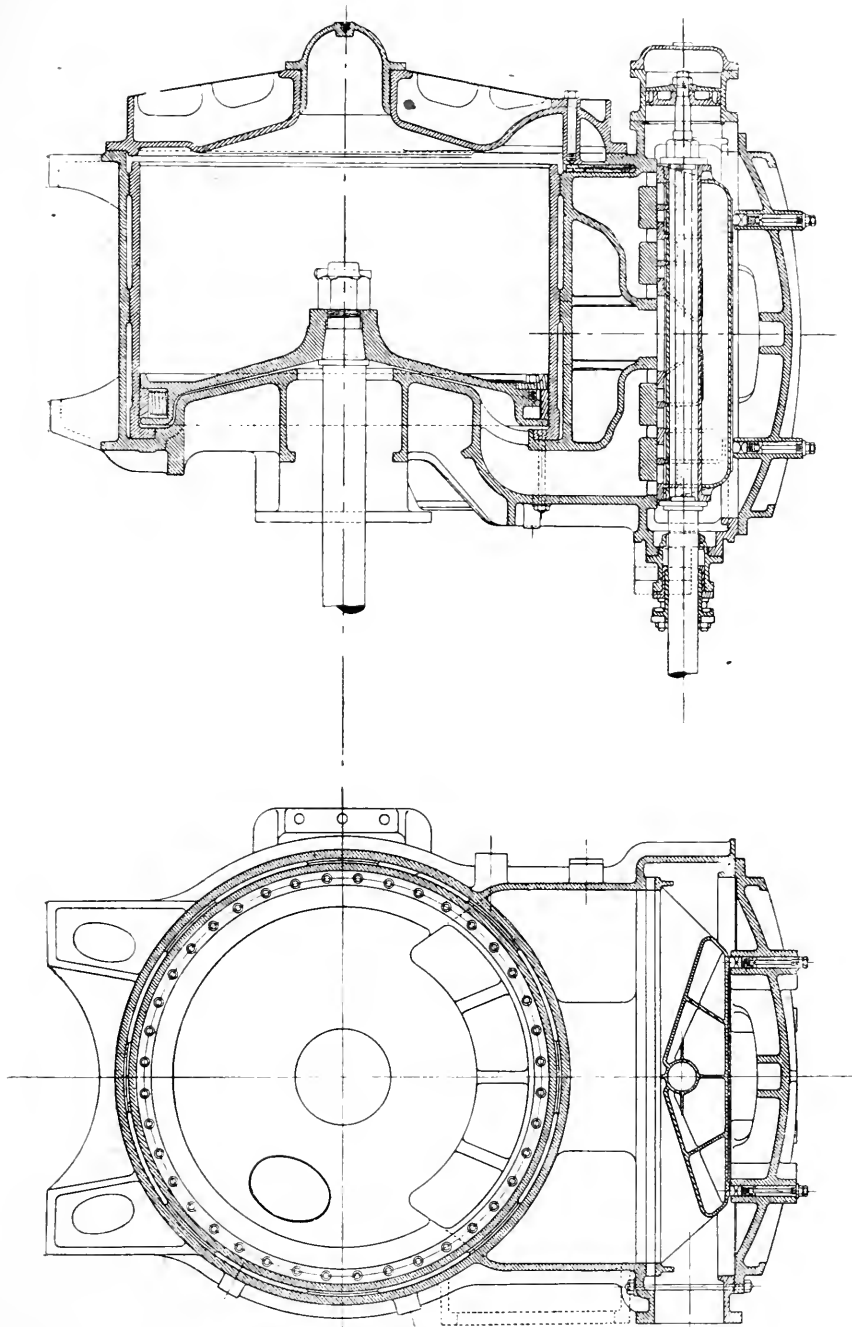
L. P. Cylinder (Naval) with Triple Steam Parts.
